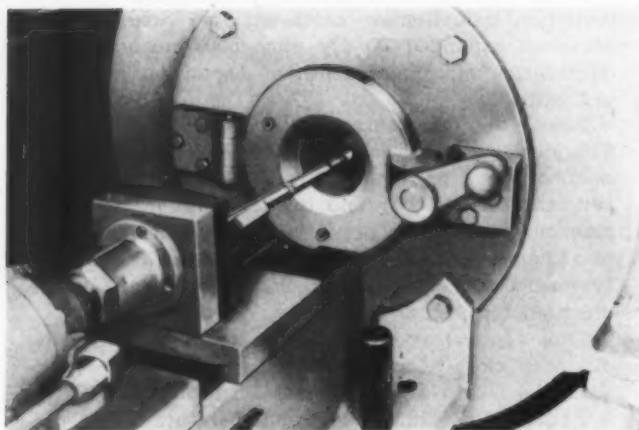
Above—Rotary swaging machine employed for assembly of knurled-swaged rod
